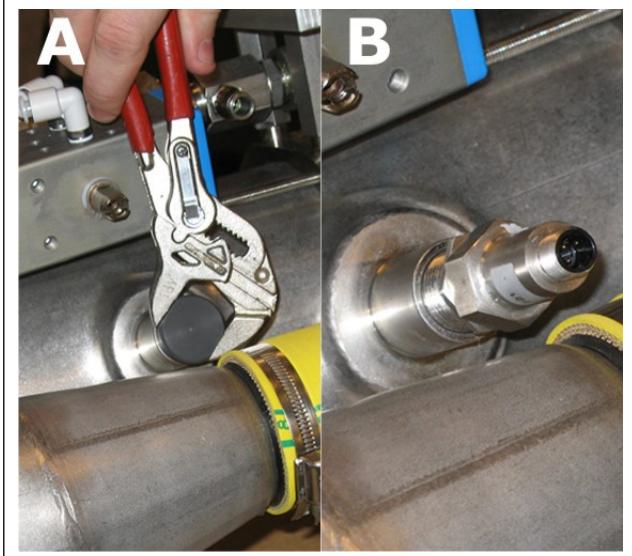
Removing connectors and adding a 2-way valve assembly to washing chamber.
